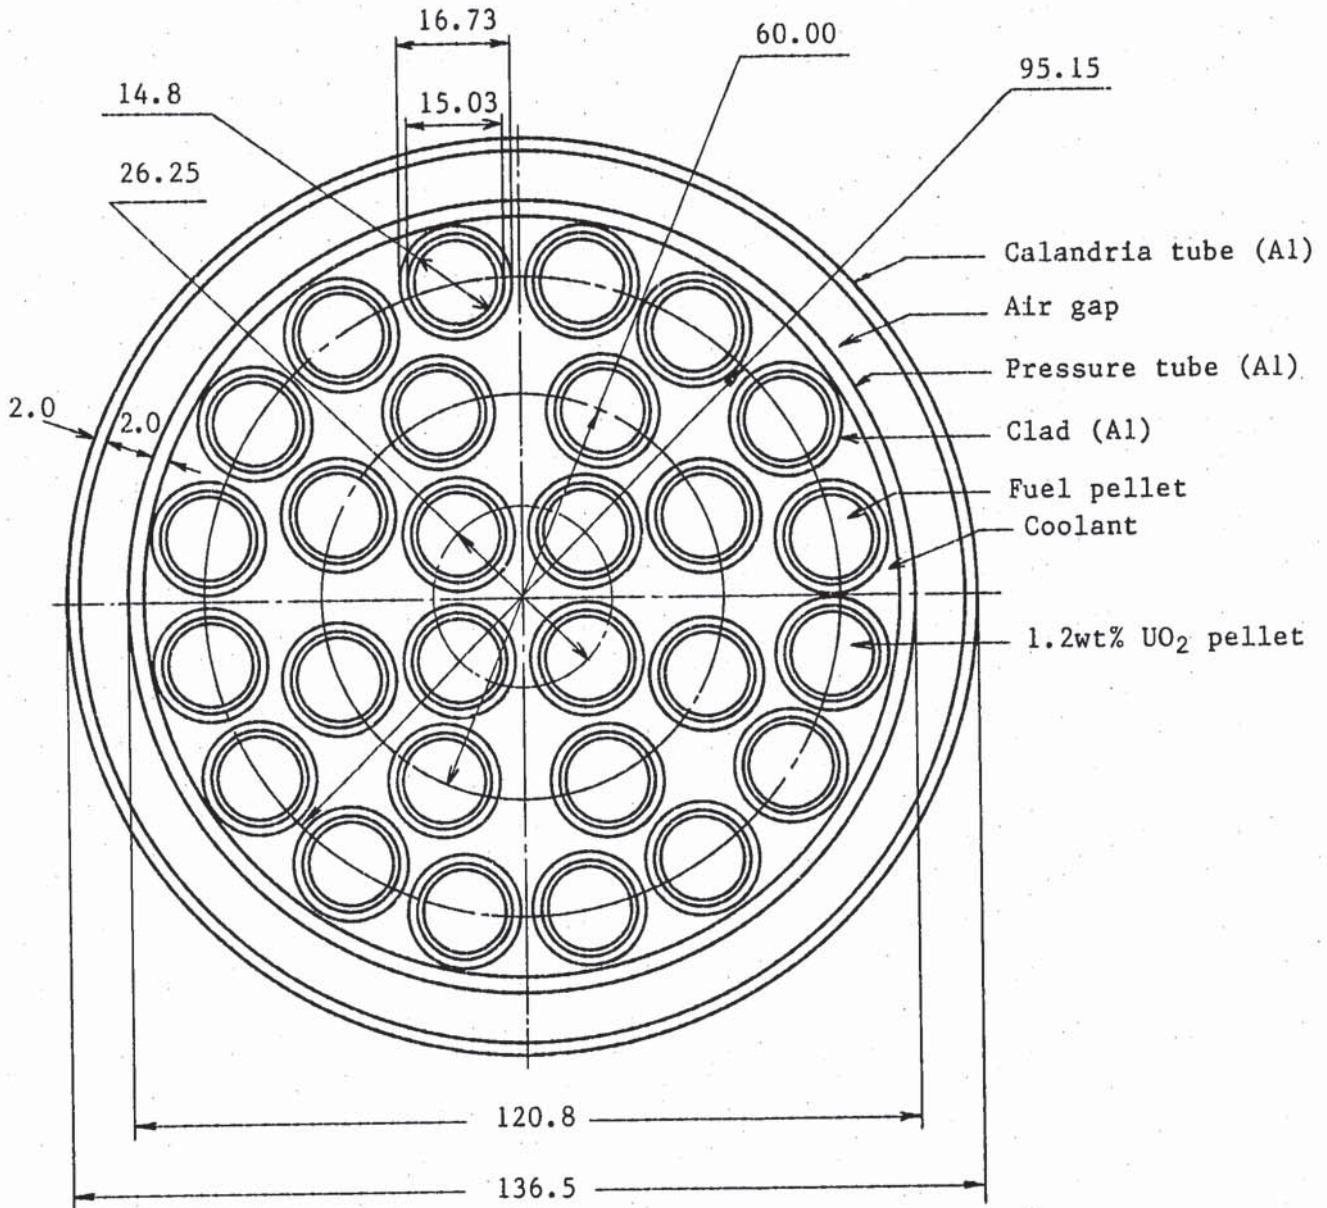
Cross-sectional view of 28-rod UO₂ cluster used in the driver region.
